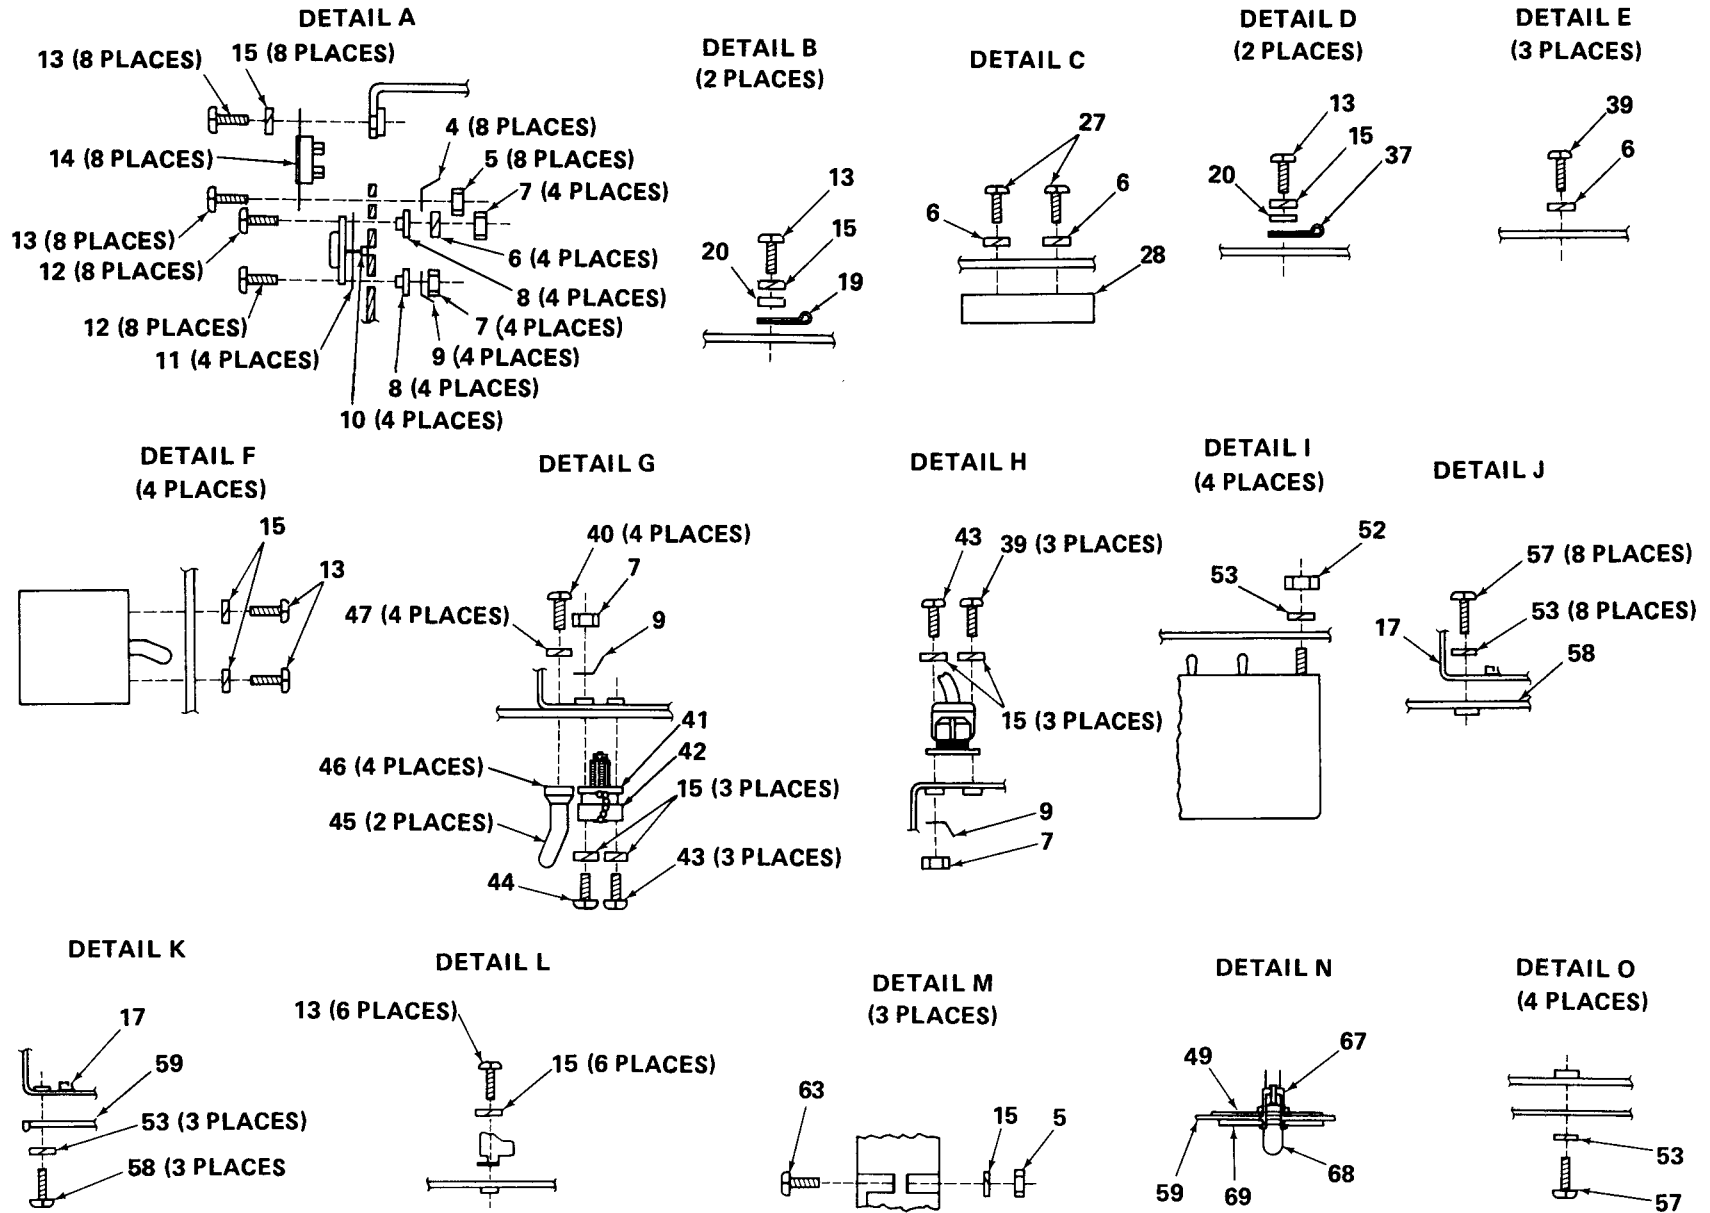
Main Chassis Subassembly (Sheet 3 of 3)
